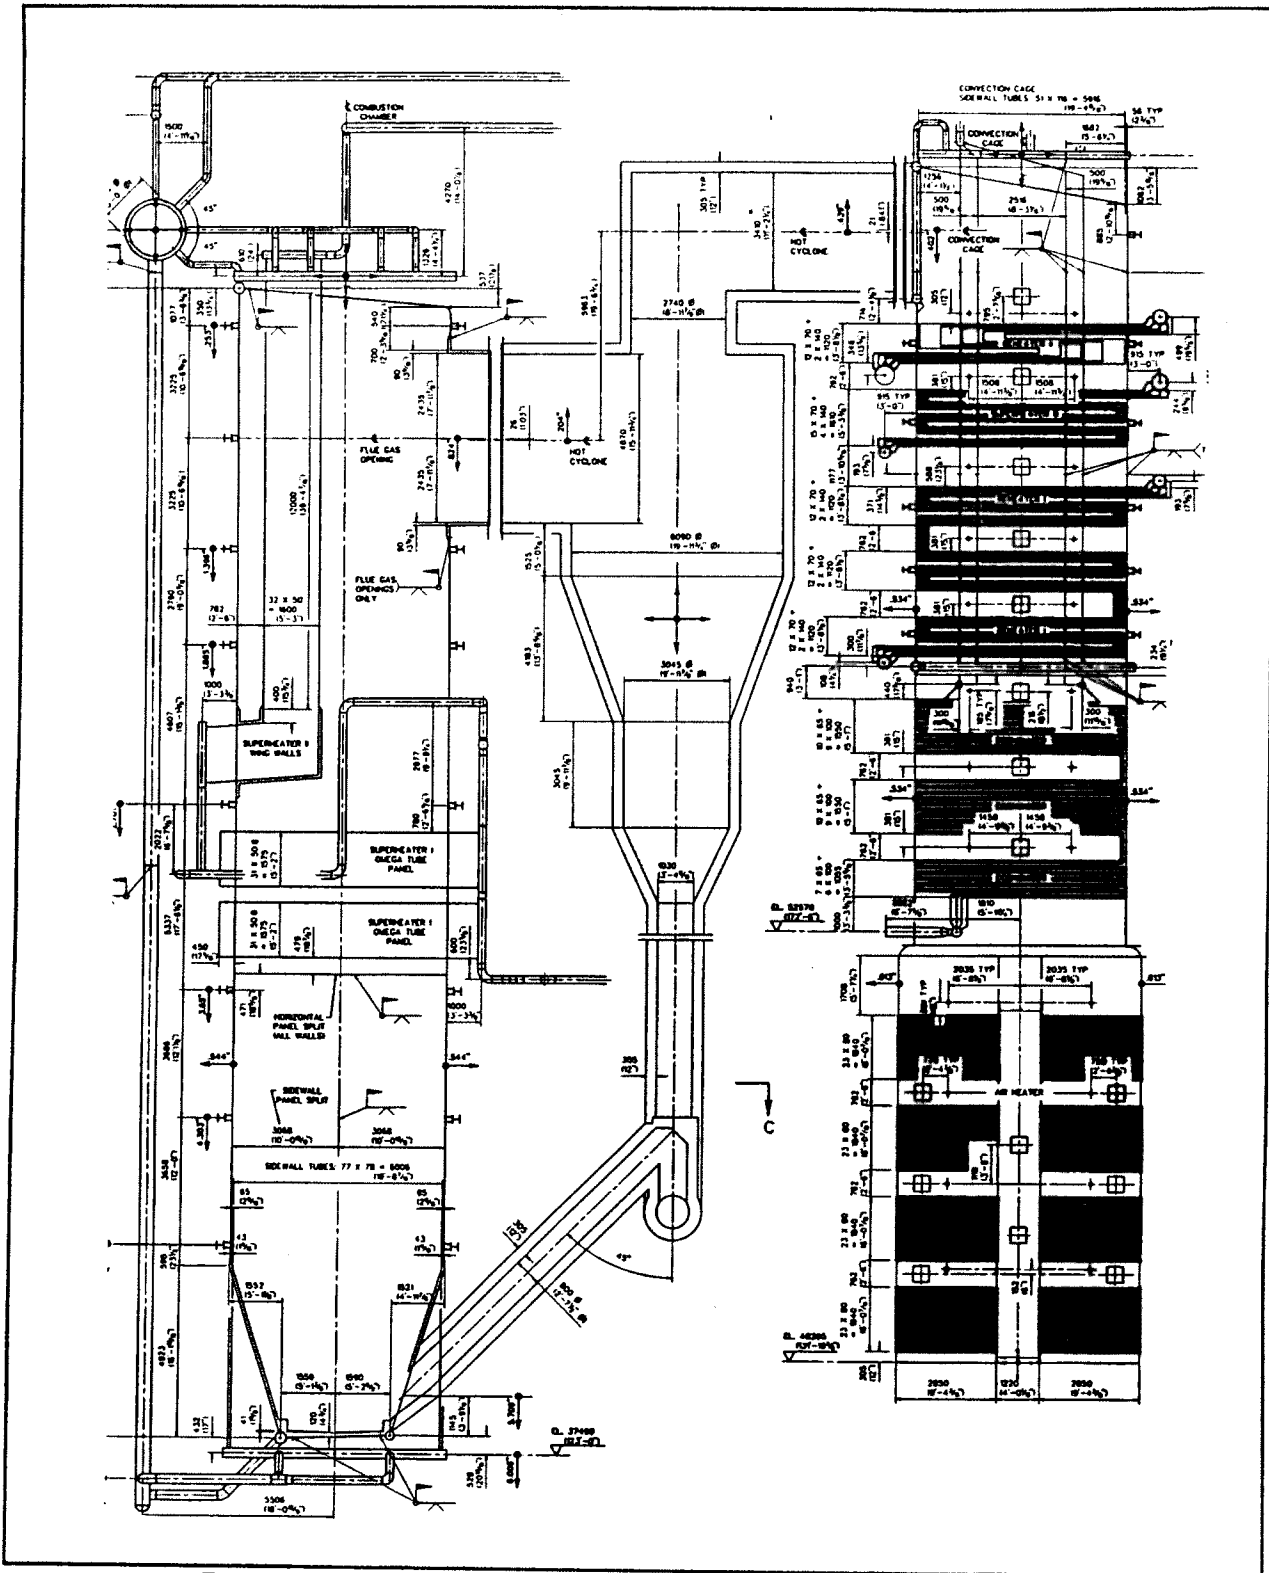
SIDE ELEVATION DRAWING OF YOUR PLANT
